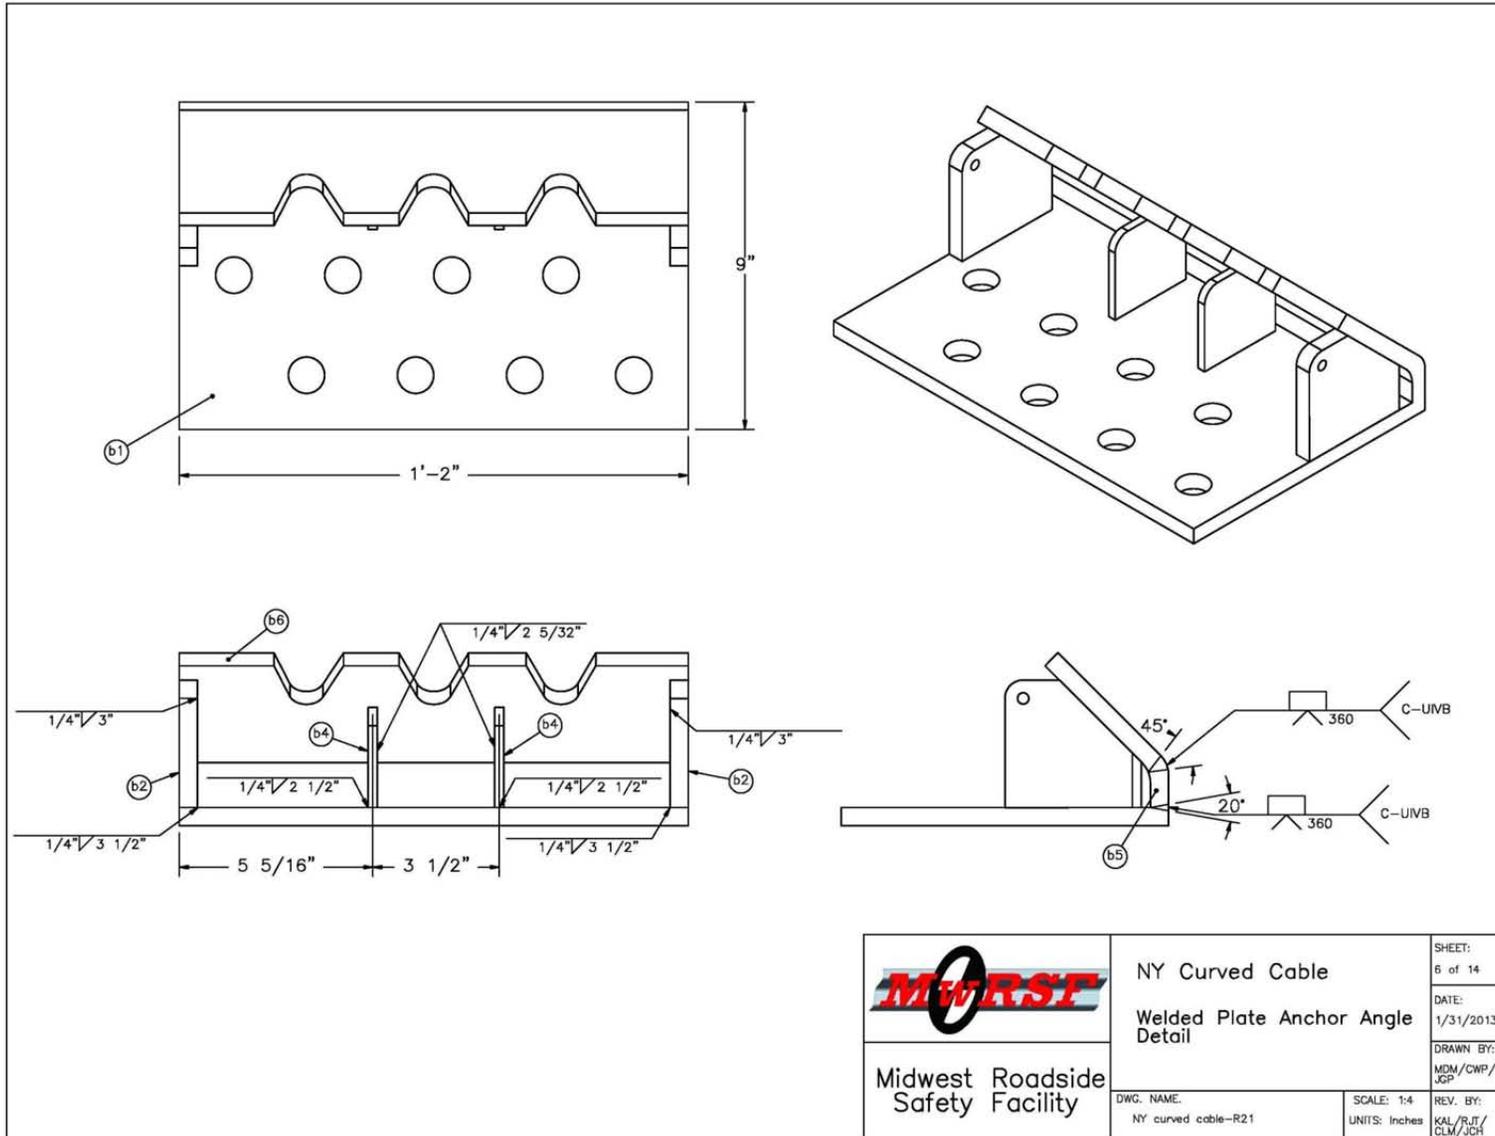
Cable Anchor Bracket Details, Test No. NYCC-1
